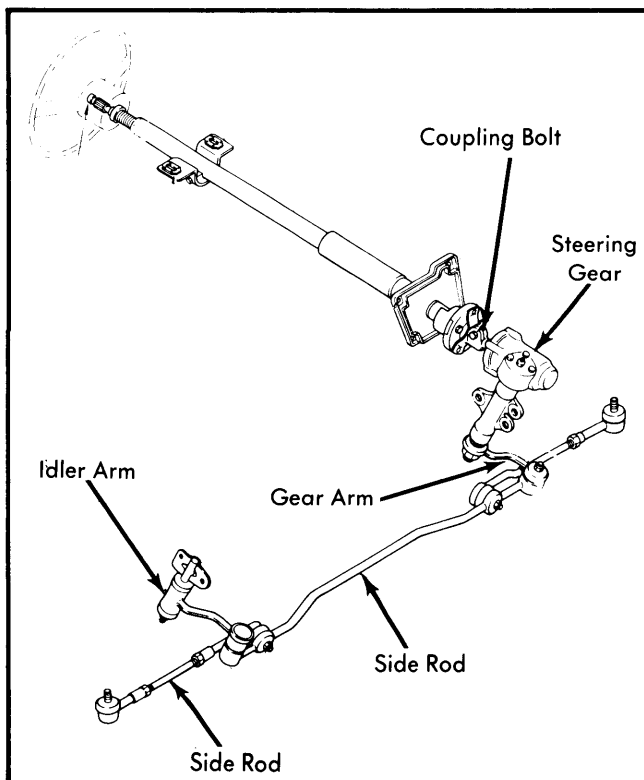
Datsun Steering Gear Linkage (210 Shown, Others Similar)
